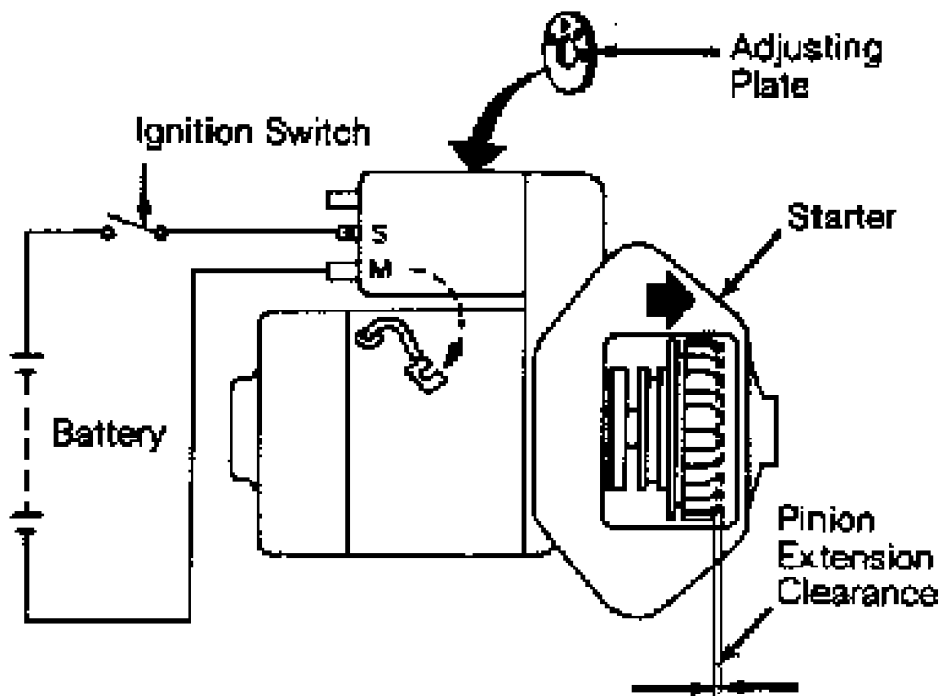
Checking Hitachi Starter Pinion Extension Clearance (G20)
